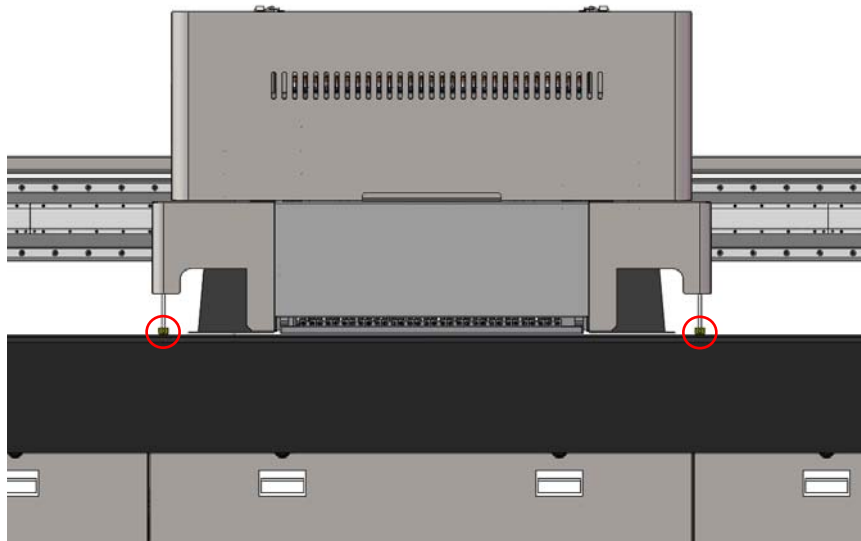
Adjusting the distance between the bumper strip of the anti-collision assembly and the printing platform
